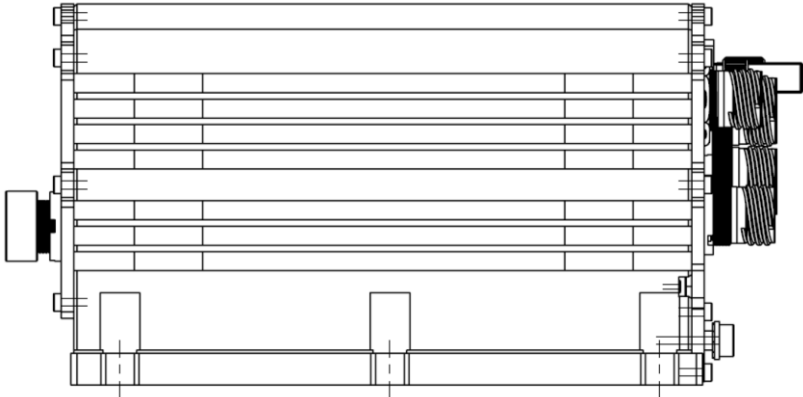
DARC-VX208-H - Dimensions – Side view (in mm)
